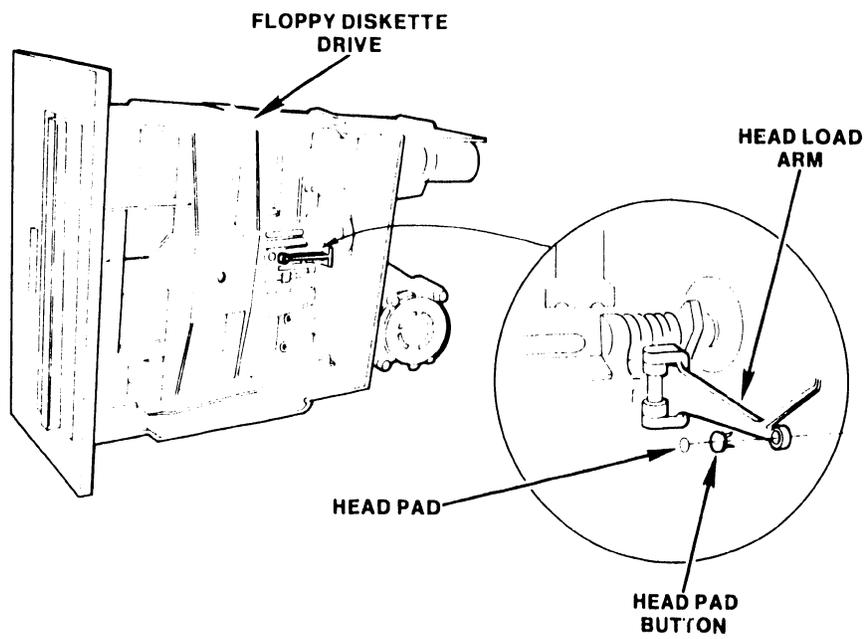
CHECKING/REPLACING THE DISKETTE DRIVE HEAD PAD
